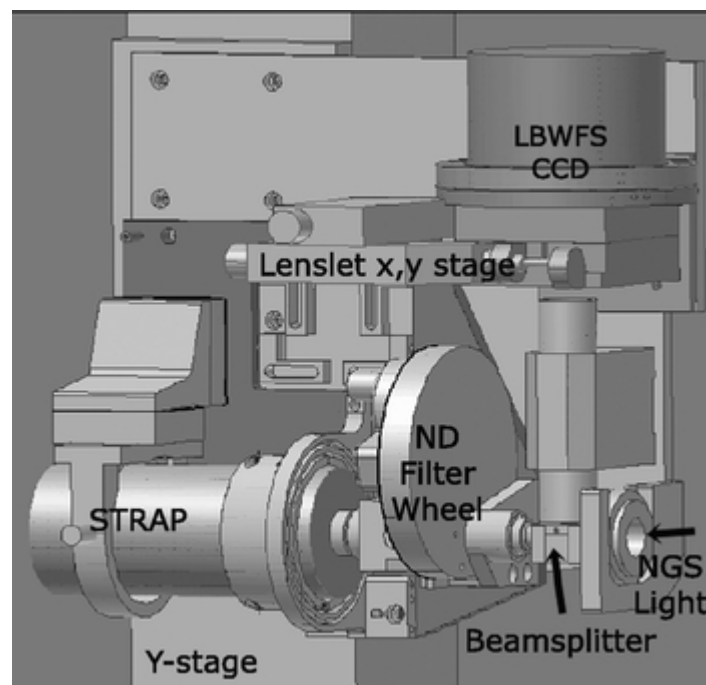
CAD drawing of the STRAP tip-tilt sensor and LBWFS.
